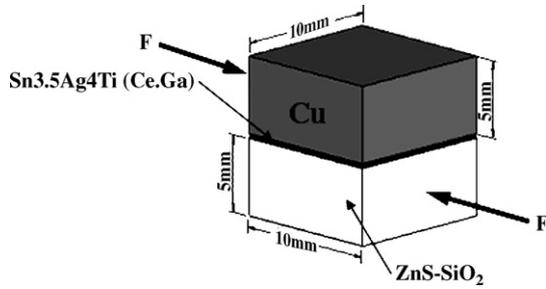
Schematic representation of the soldered specimens ready for shear testing in this study.
